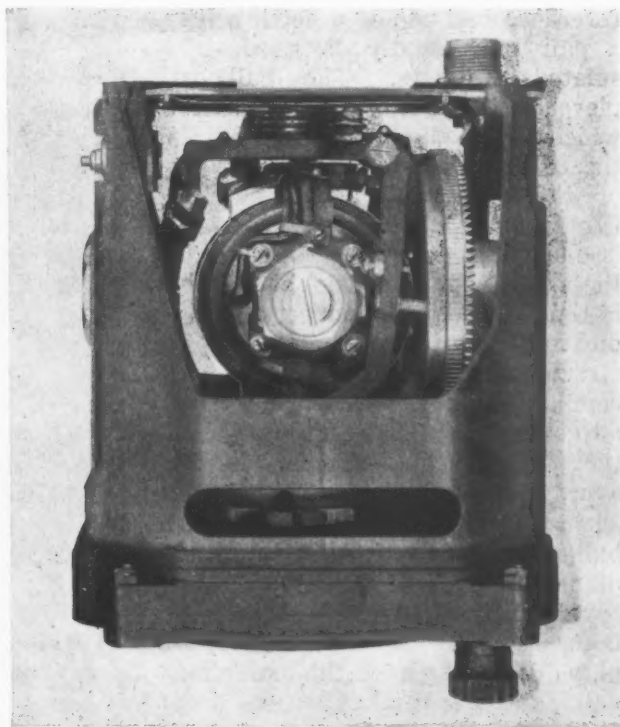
View Showing Part of Mechanism of Gyroscope Control Unit
